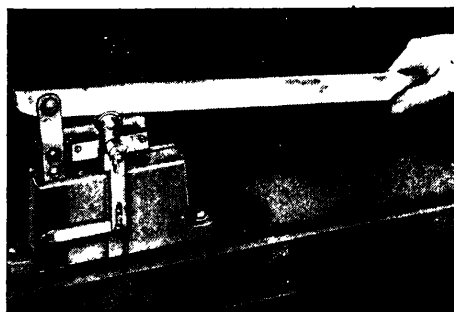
Machine for checking leak-down rate of hydraulic valve lifter. Instructions for use of this equipment if furnished by manufacturer
